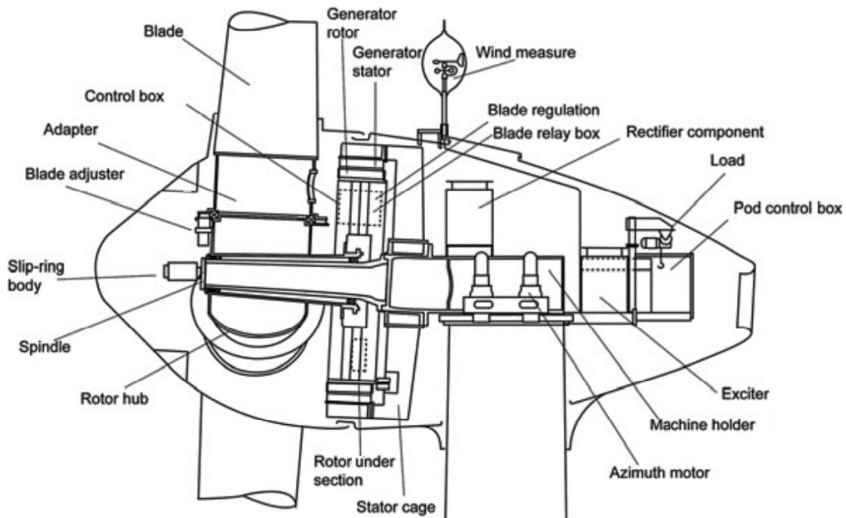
Wind turbine without gearbox and details of technical equipment (design of ENERCON Company).
